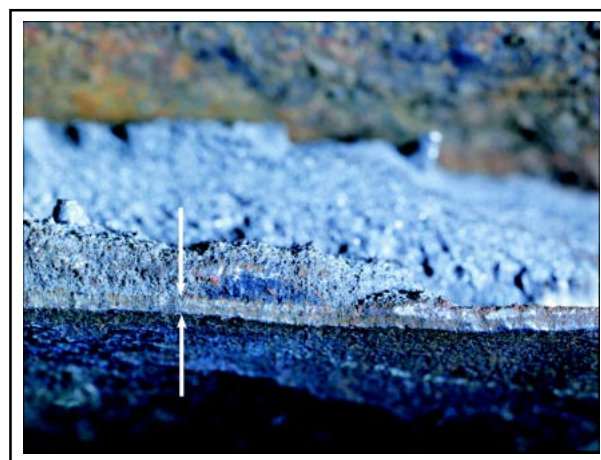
The outer half of the fracture surface was observed to have rust in places. The old crack (arrows) along most of the outer surface is clearly rusted.
